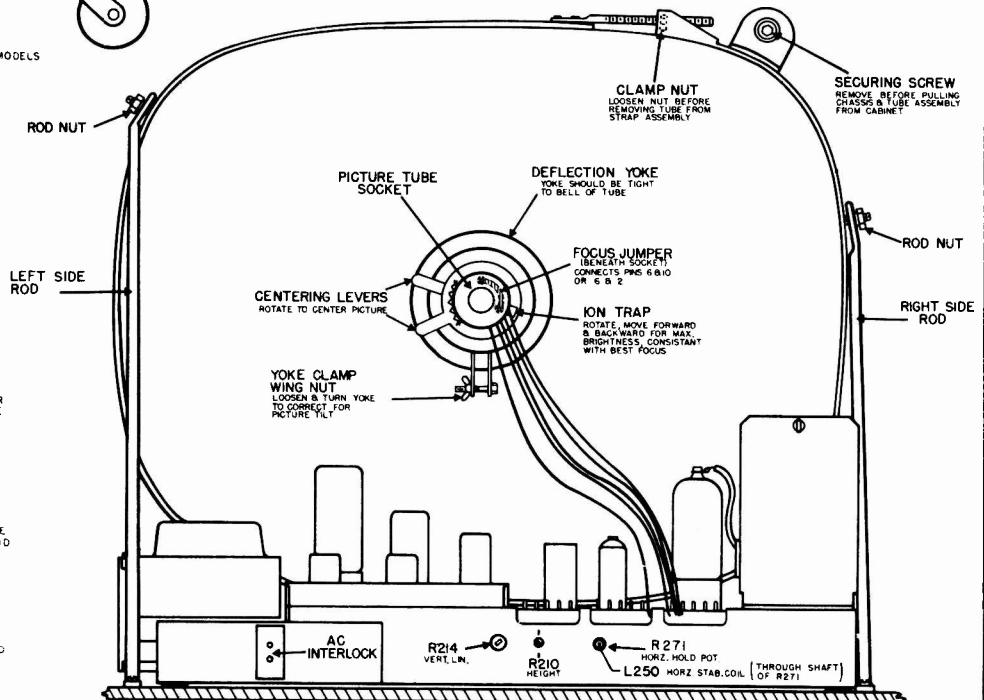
REAR VIEW, PICTURE TUBE & REAR CHASSIS ADJUSTMENTS (TUNER UNIT & FRONT CONTROL BRACKETS NOT SHOWN)
